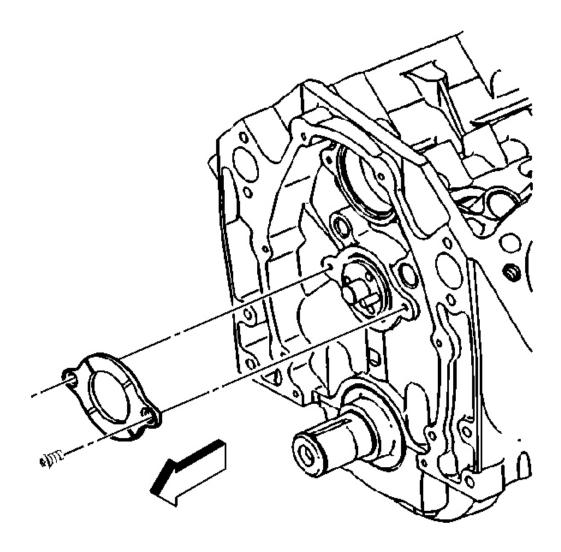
View Of Camshaft Retainer & Bolts Courtesy of GENERAL MOTORS CORP.
